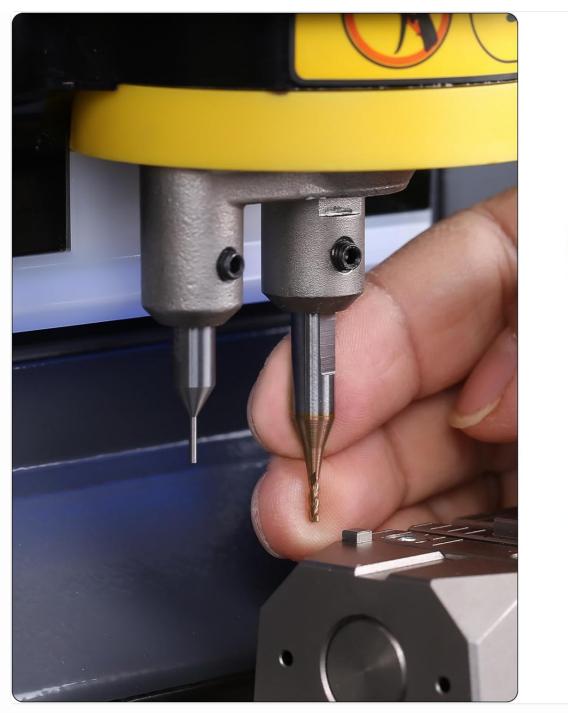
Installing the milling cutter into an Xhorse key cutting machine.
